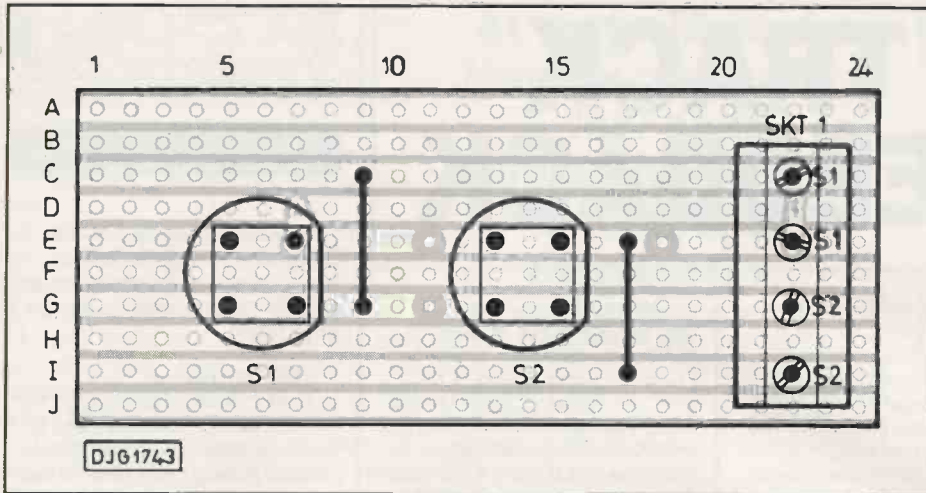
Module 1, stripboard layout. Note the track cuts and solder blob.
